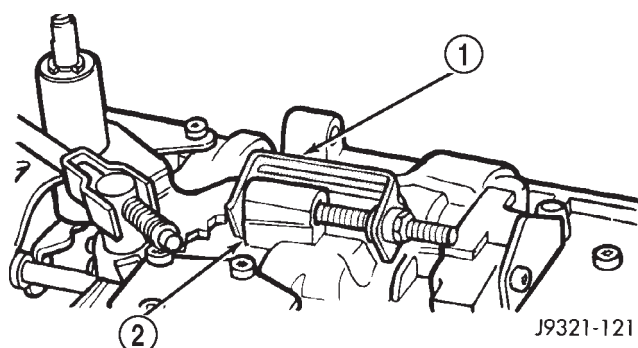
Securing Detent Ball And Spring With Retainer Tool
